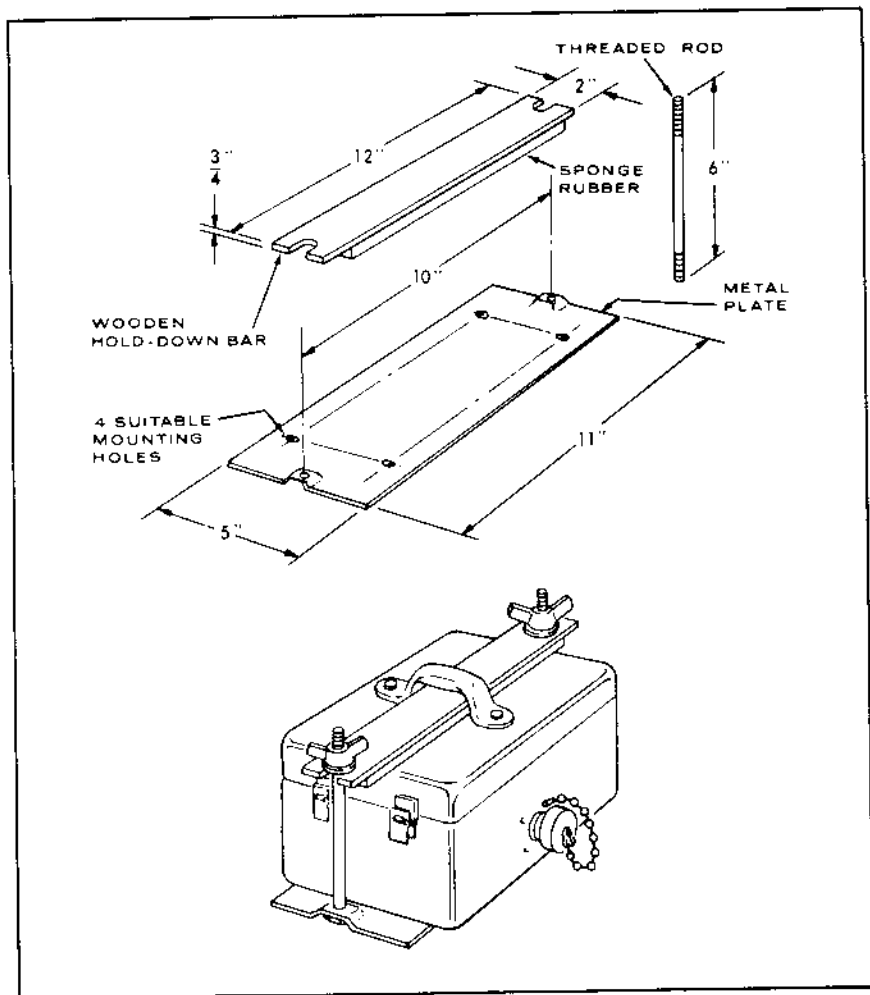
Suggested Bracket for Mounting Detector Unit
